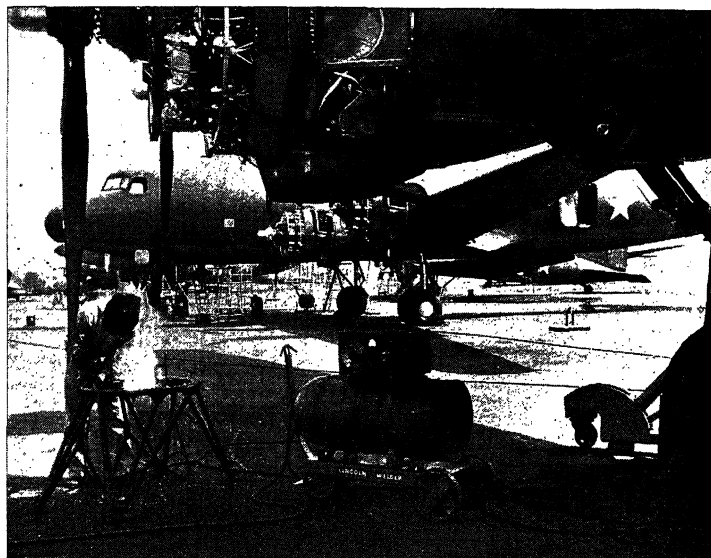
Welding an aircraft engine mount. (Courtesy of Lincoln Electric Co.)
